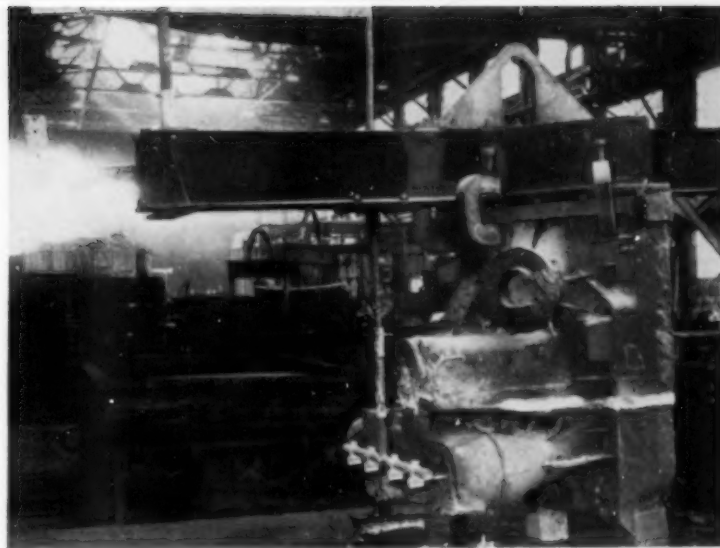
Steam turbine shell casting with lifting device and electrodes in place, after steam chest portion of casting was experimentally cleaned by electrolytic molten caustic method. Note surface conditions above and below line marking immersion depth.
